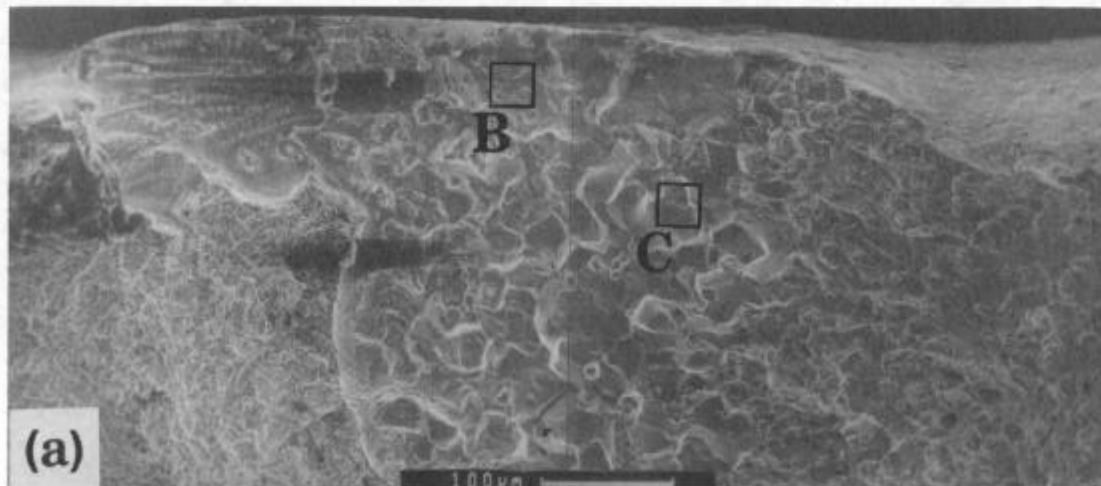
Fracture surface of SOB tested specimen of Alloy 718 weld:
